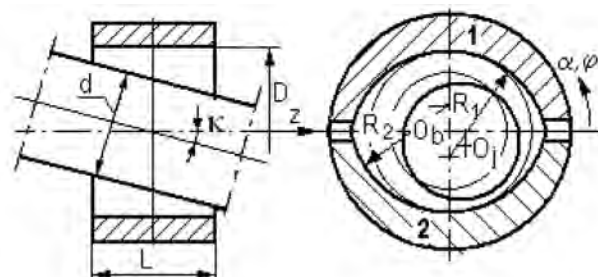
Geometry of misaligned bearing; $R_{1,2}$ – radii of segments, O_b, O_j – centre of bearing and journal
